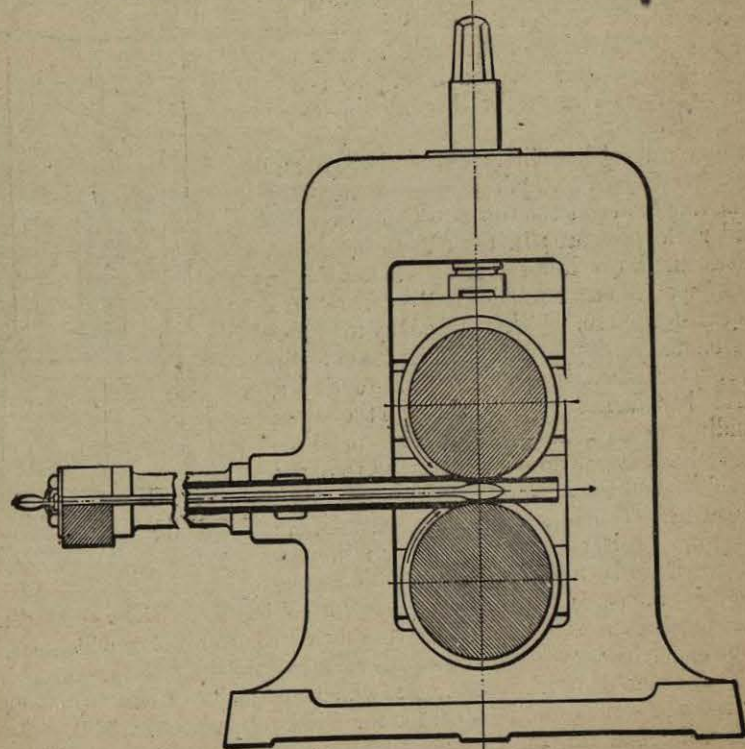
Rolling Weldless Tubes—“Rolling-off.”
